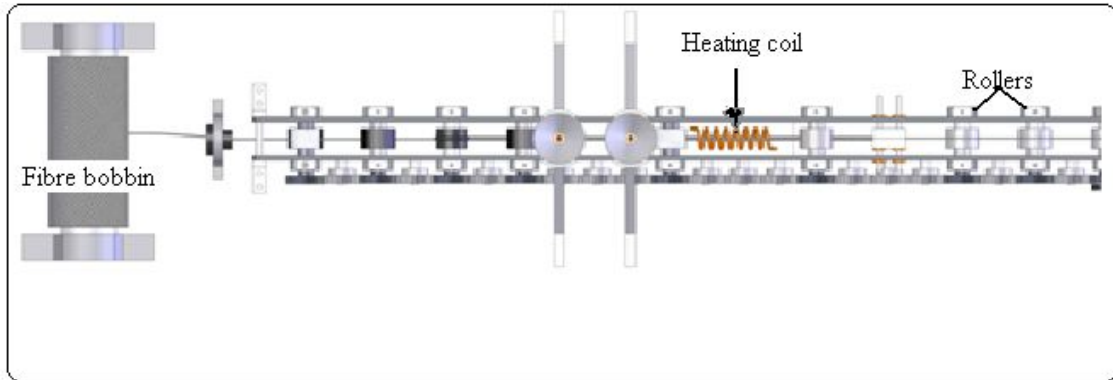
(b) Top view showing the first stage of operation of the machine
